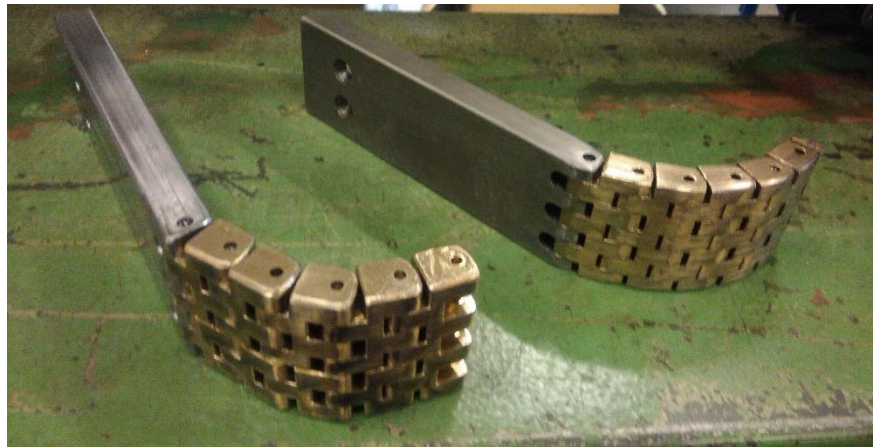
Draw bending mandrels segments made with brass for lower friction and wear out resistance
